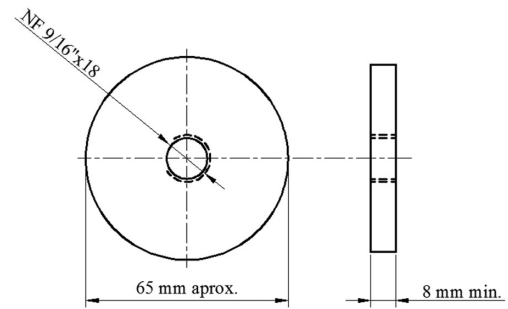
Scheme of the sliding test samples geometry and dimensions.
